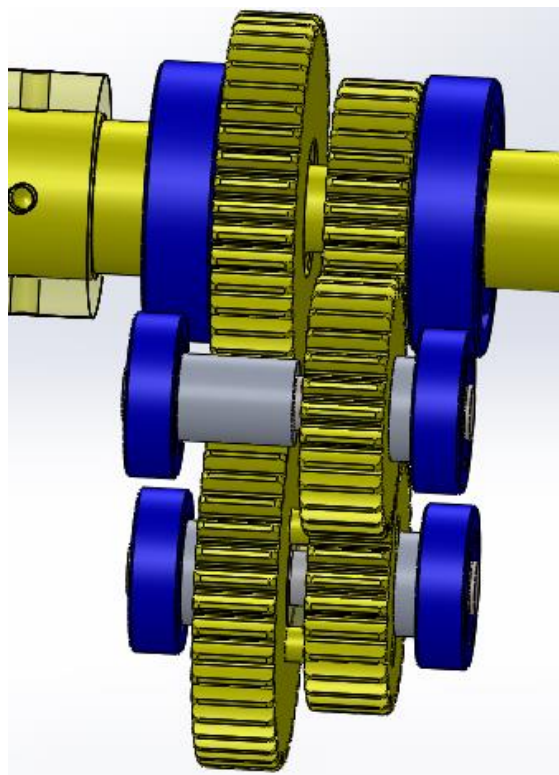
The input shaft is shown on the right, and the outer shaft is shown on the left. There is no rpm change as each gear meshes with a gear having the same number of teeth. The large and small gears at the bottom are pinned together.
